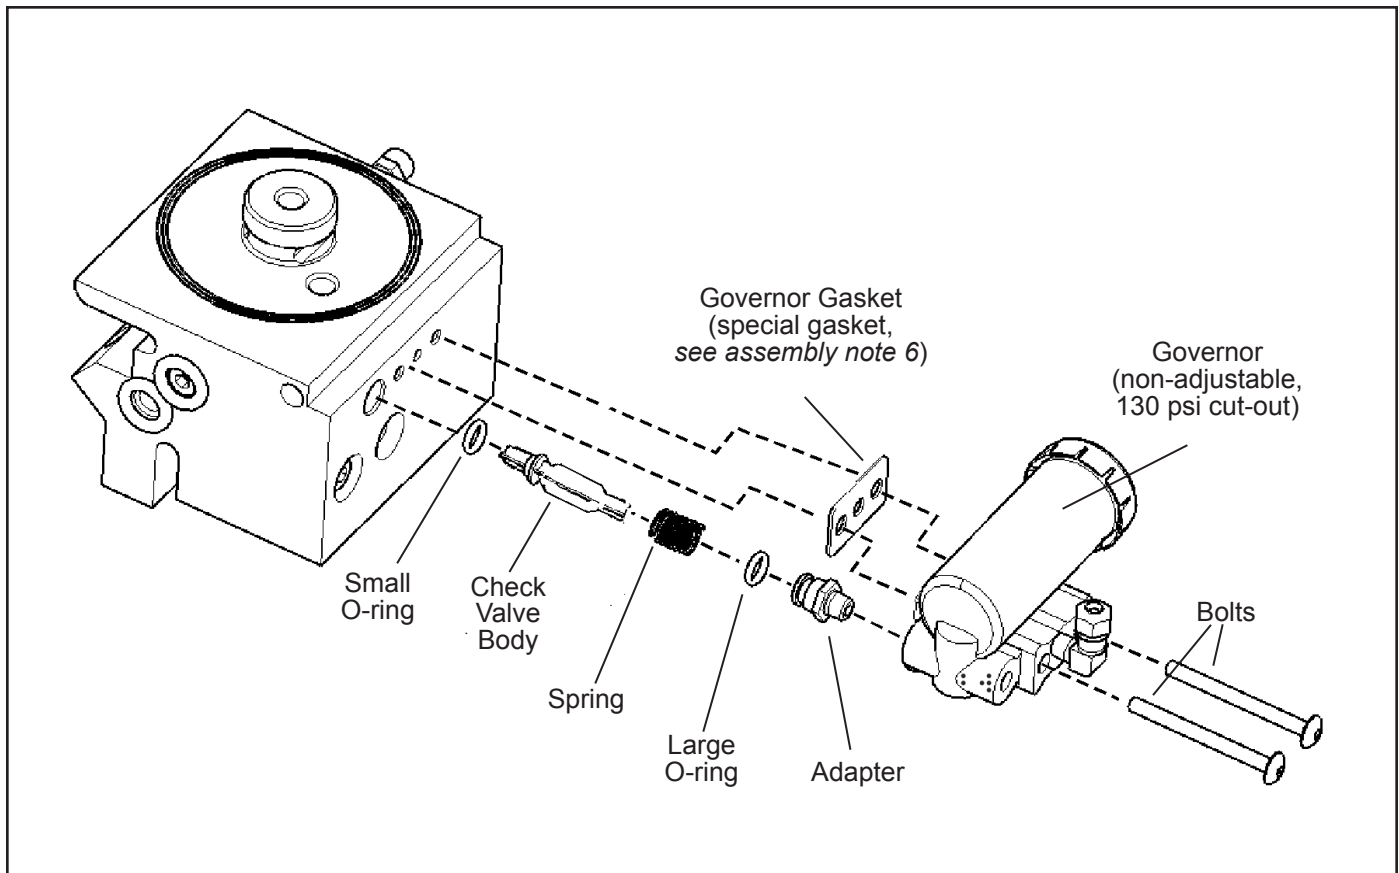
Bendix® AD-IS® Air Dryer & Reservoir System Delivery Check Valve
